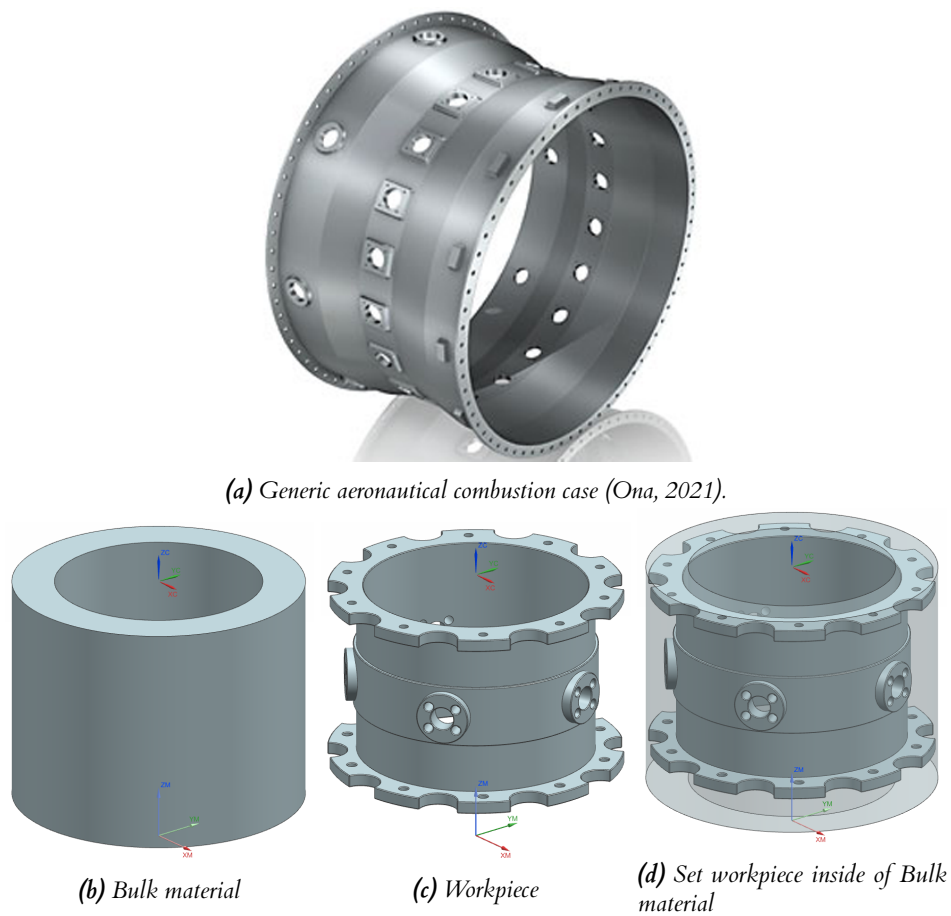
Complex shape workpiece achievable through the use of turn-milling operations. Technical drawing in the appendix.
